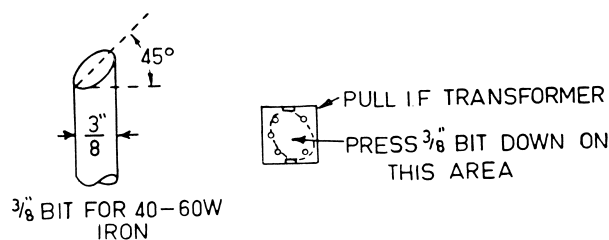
SOLDERING BIT AND I.F. REMOVAL.
